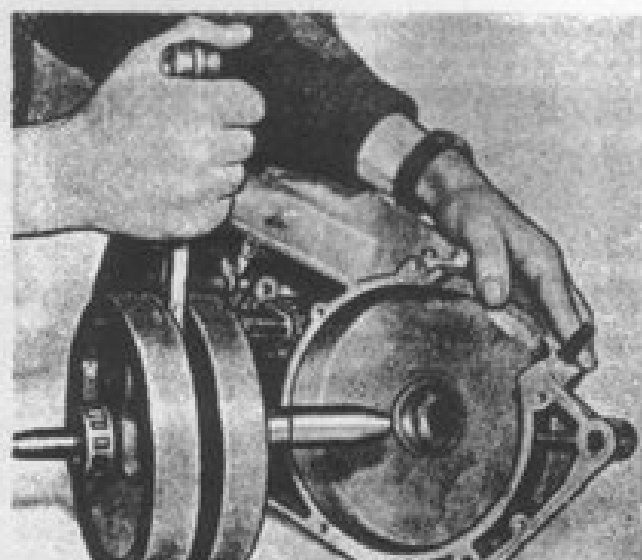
Crankshaft mounting in crankcase left-hand half, HЖ-II-3 motorcycle.
